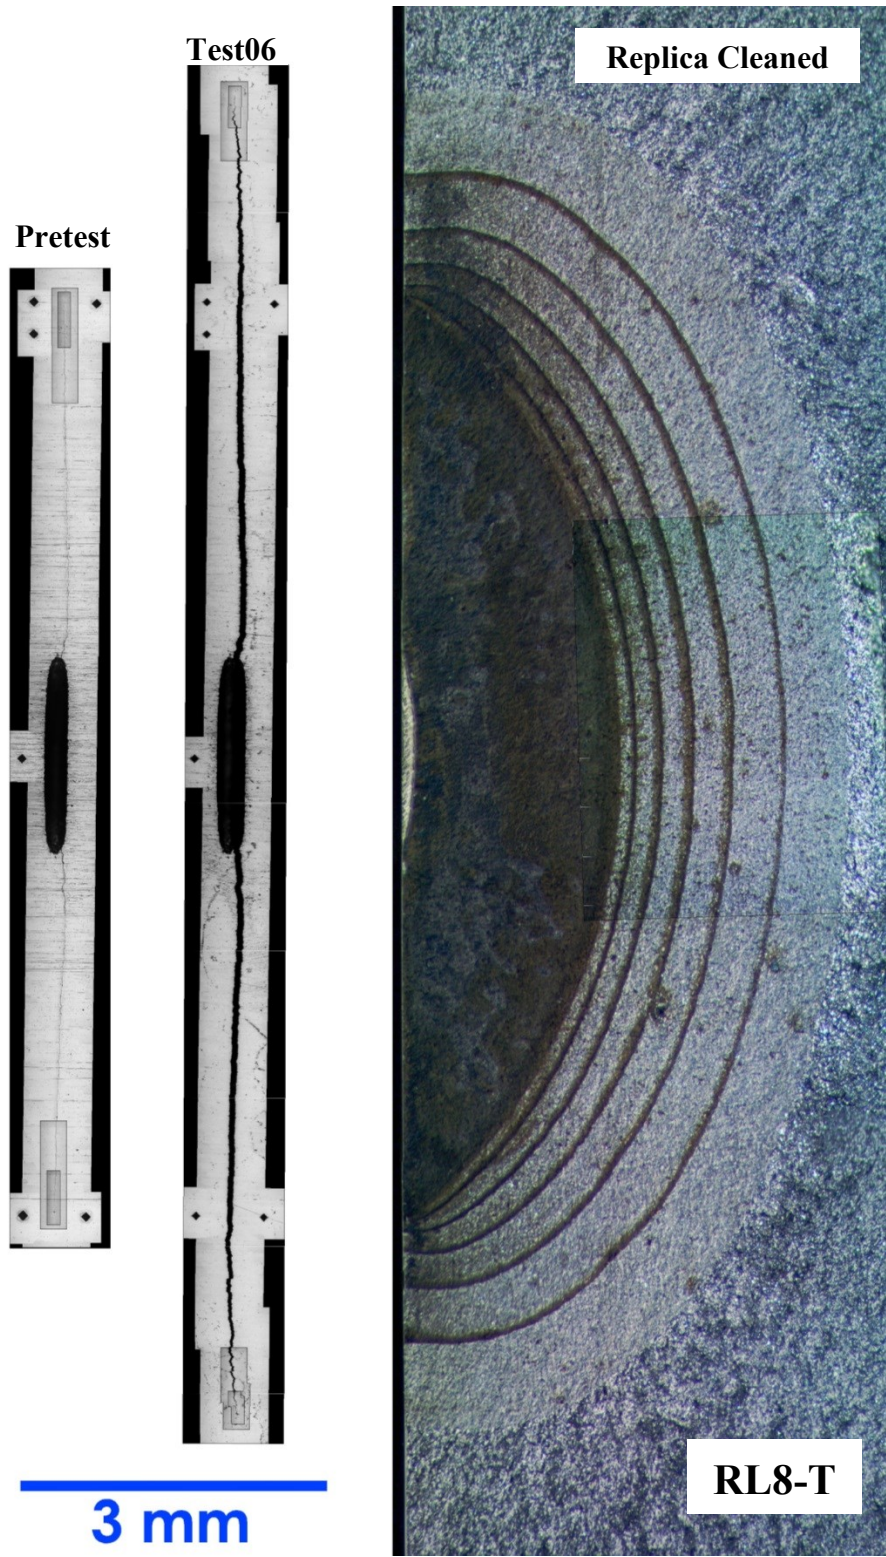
Surface images and fractograph for RL8-T. The surface images were taken prior to testing and after test06. The fracture surface was cleaned with replicating tape.
